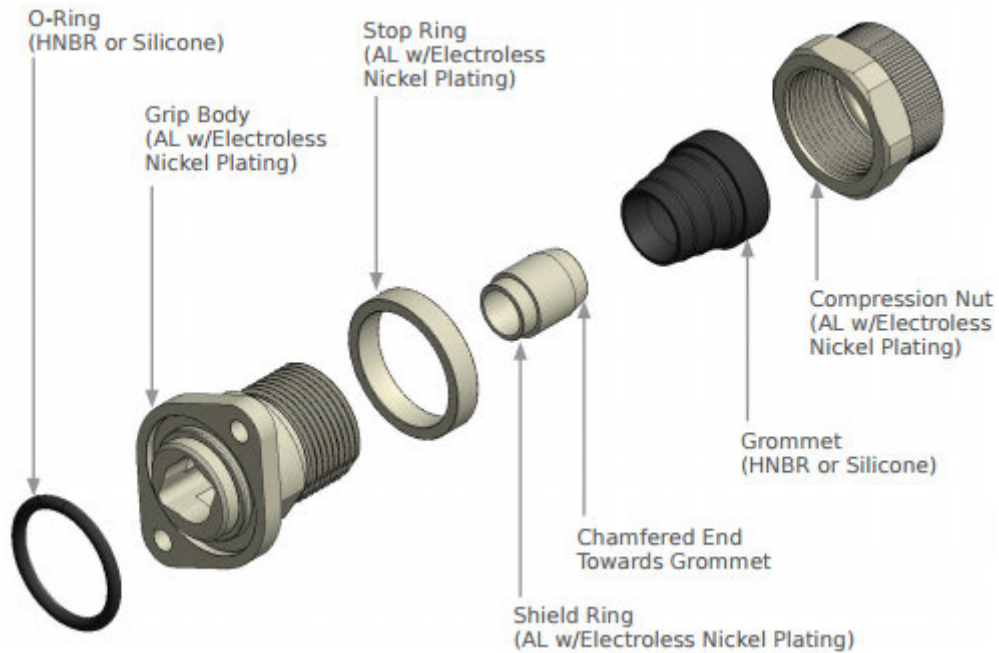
Exploded view of MAX-LOC[®]-connector by Molex (Molex 2015)
